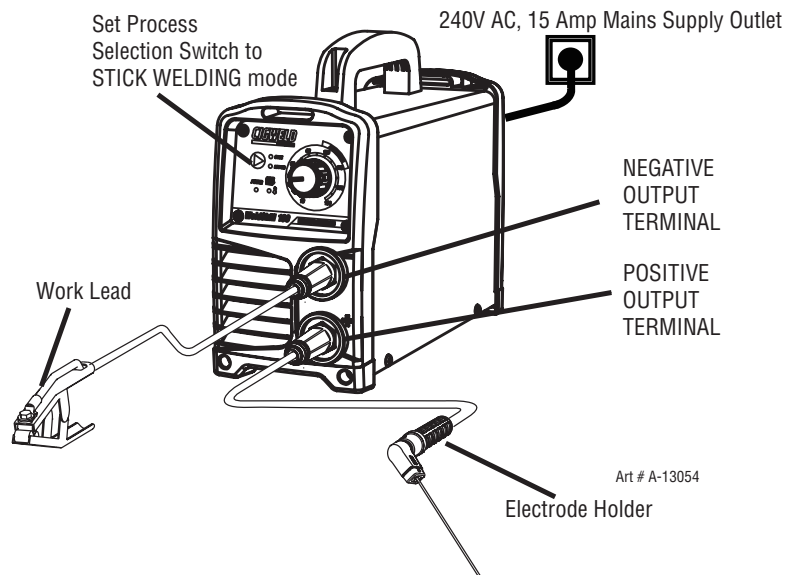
Setup For STICK (MMAW) Welding
